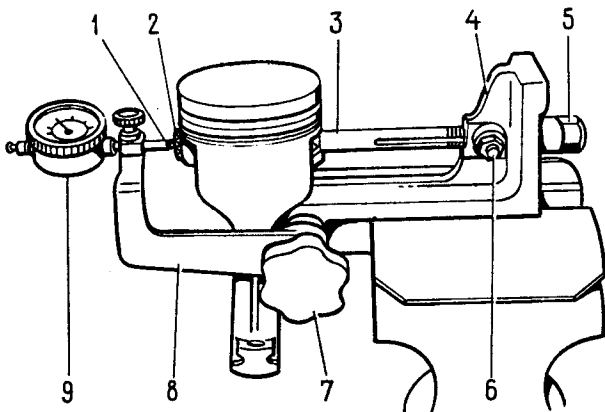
Assembled Piston-Pin-Connecting Rod Group Installed on Tester A.95615 for Pin Pressing-Out Test:
